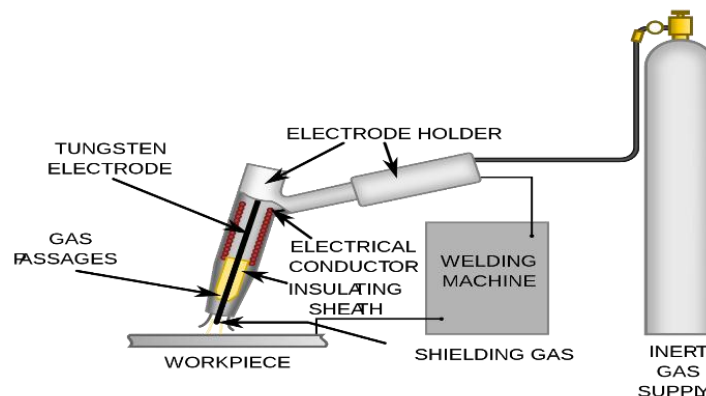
Diagram of TIG Welding Equipment [8]
